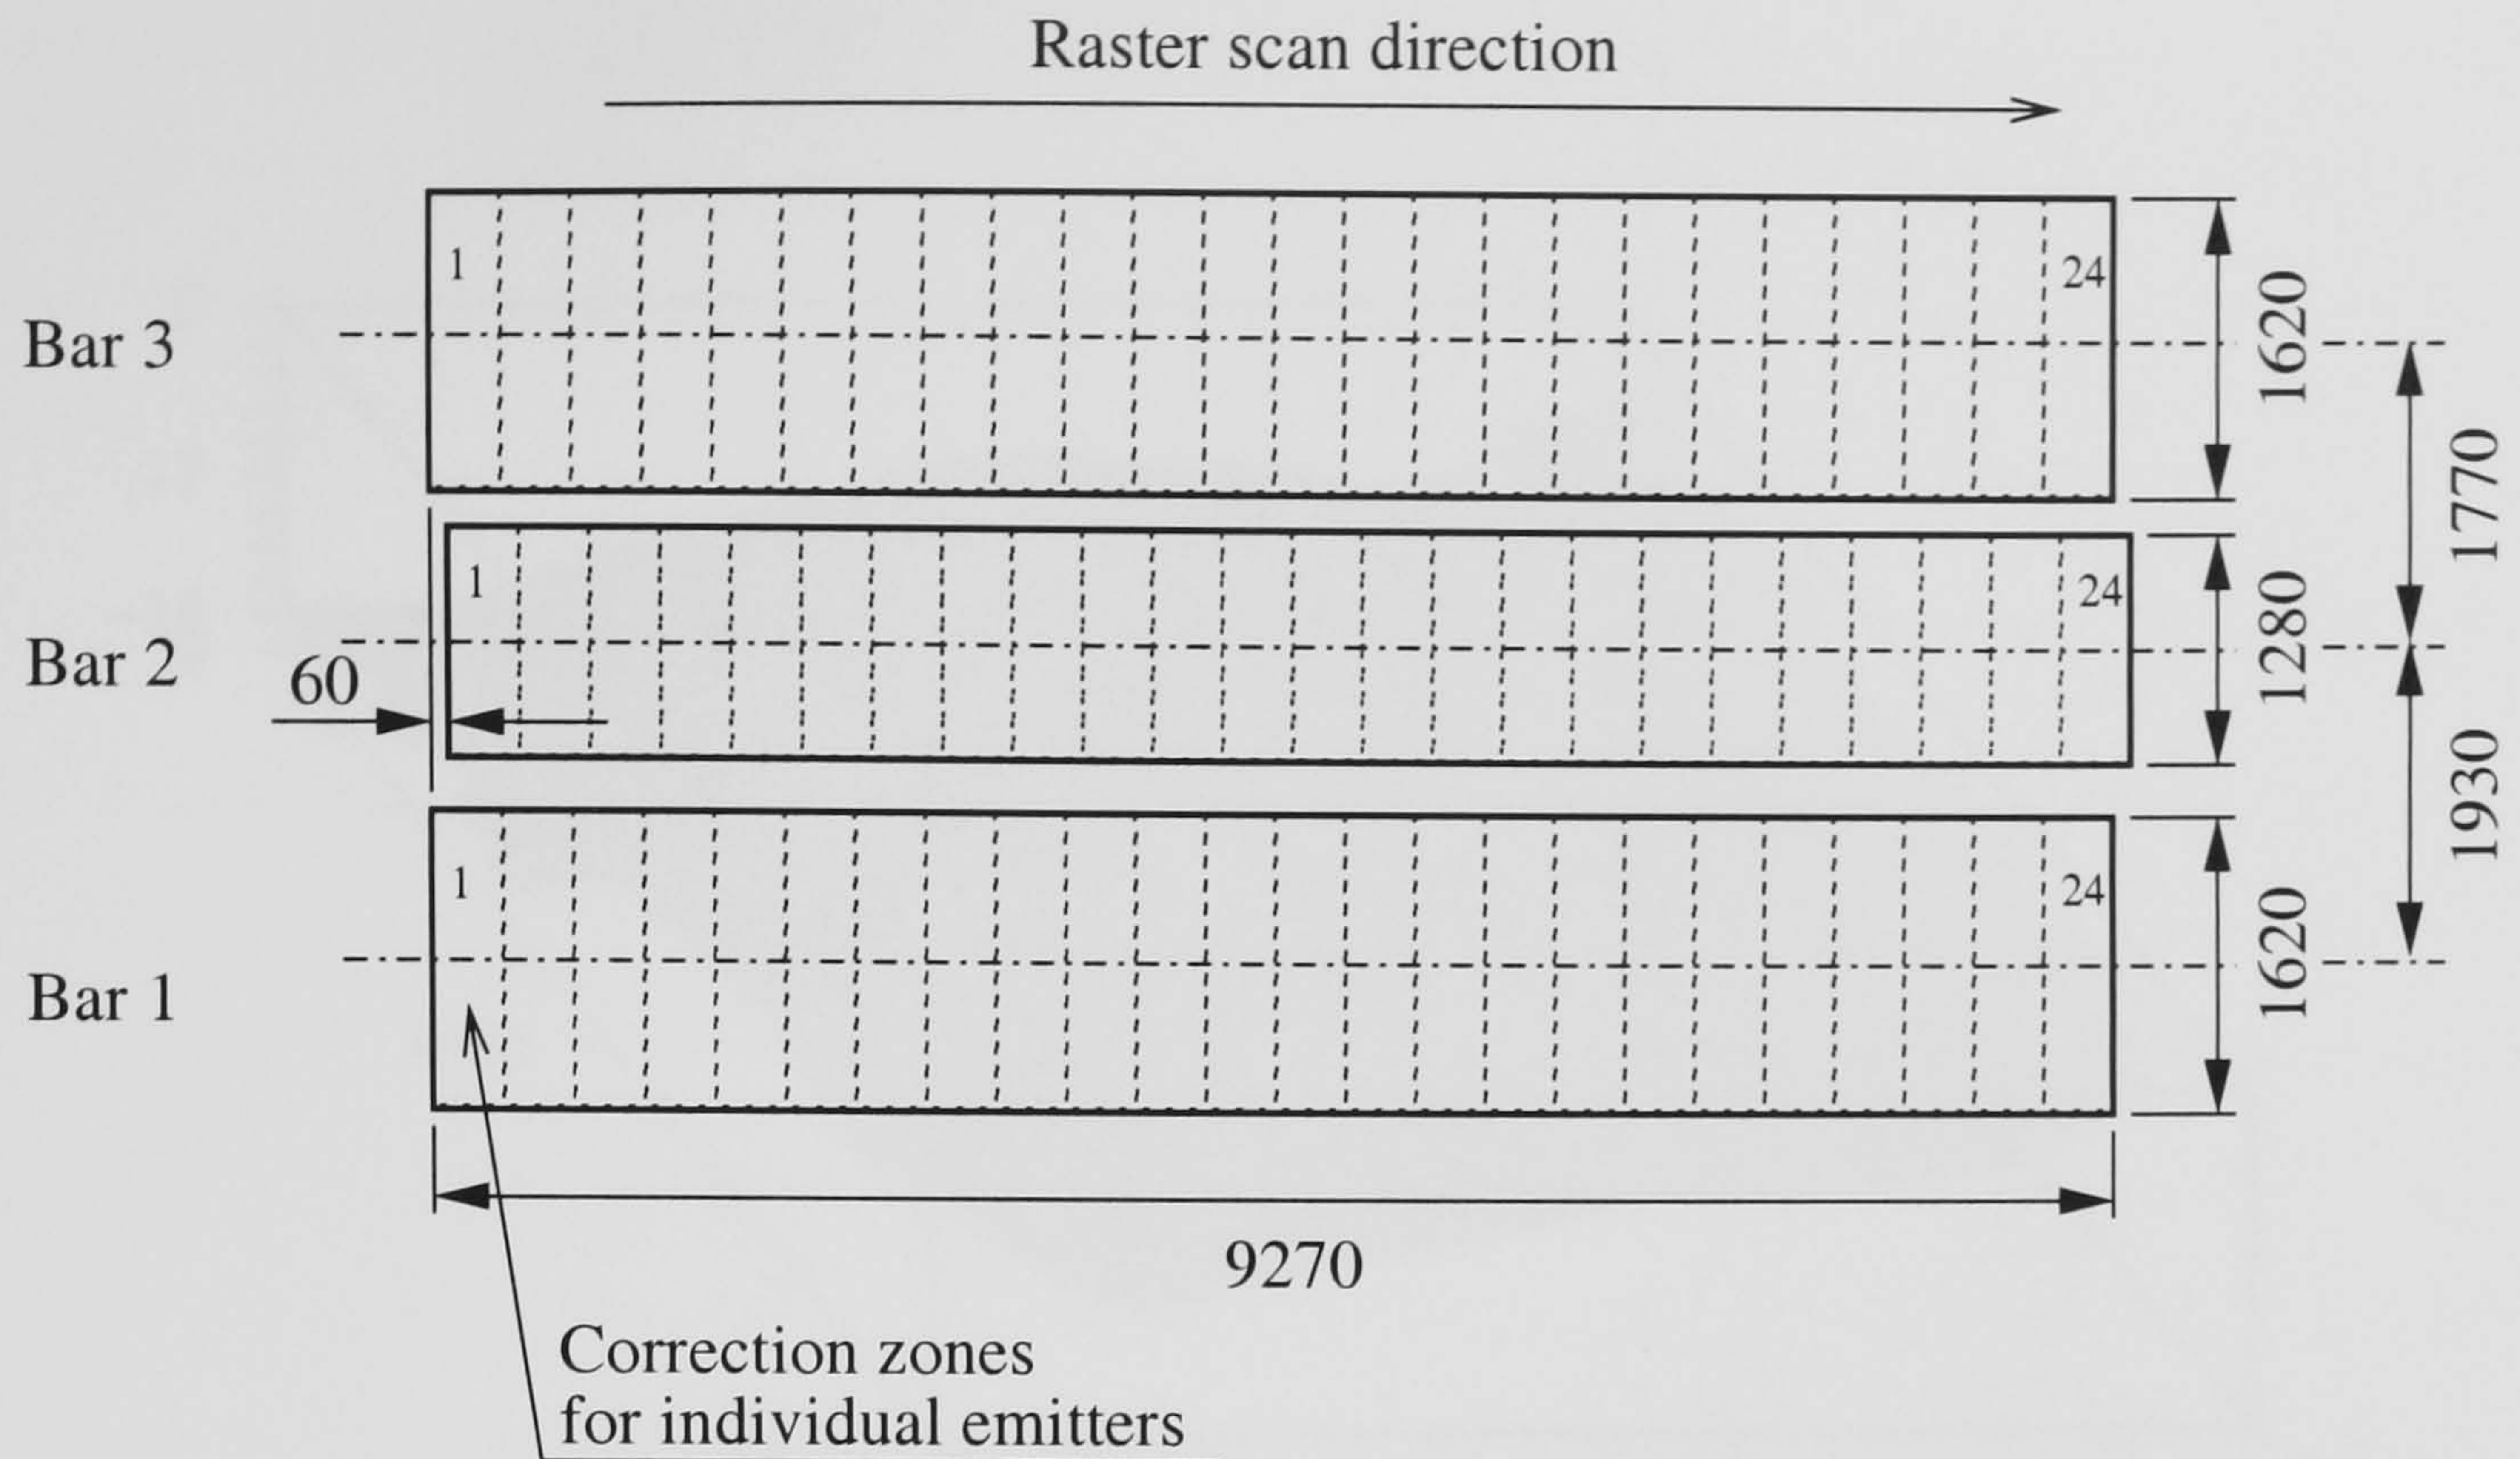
The layout of correction surfaces for diode bars 1-3, viewing from the side of machining. The positioning reflects the arrangement of measurement points (illustrated in Figure 7.2 p.172), which in turn shows the extent of assembly errors of three diode bars in the stack. Different height of correction surfaces was the result of different beam widths for individual lensed diode bar. The correction zones, indicated in above figure, have been smoothly merged together, as shown in Figures 7.8-7.10. All dimensions in microns.
